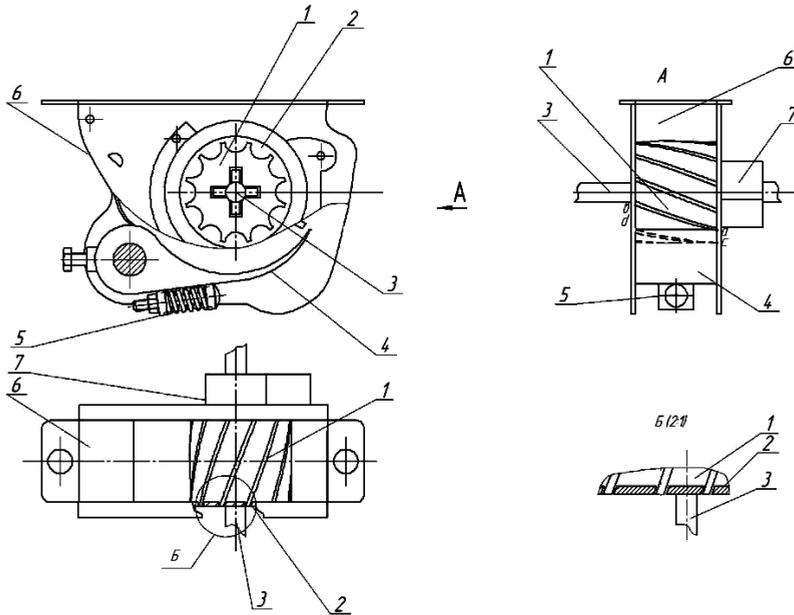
Scheme of the sowing machine: 1 - coil with helical grooves; 2 - socket; 3 - shaft of the sowing machine; 4 - valve; 5 - adjusting bolt; 6 - seed box; 7 - clutch
